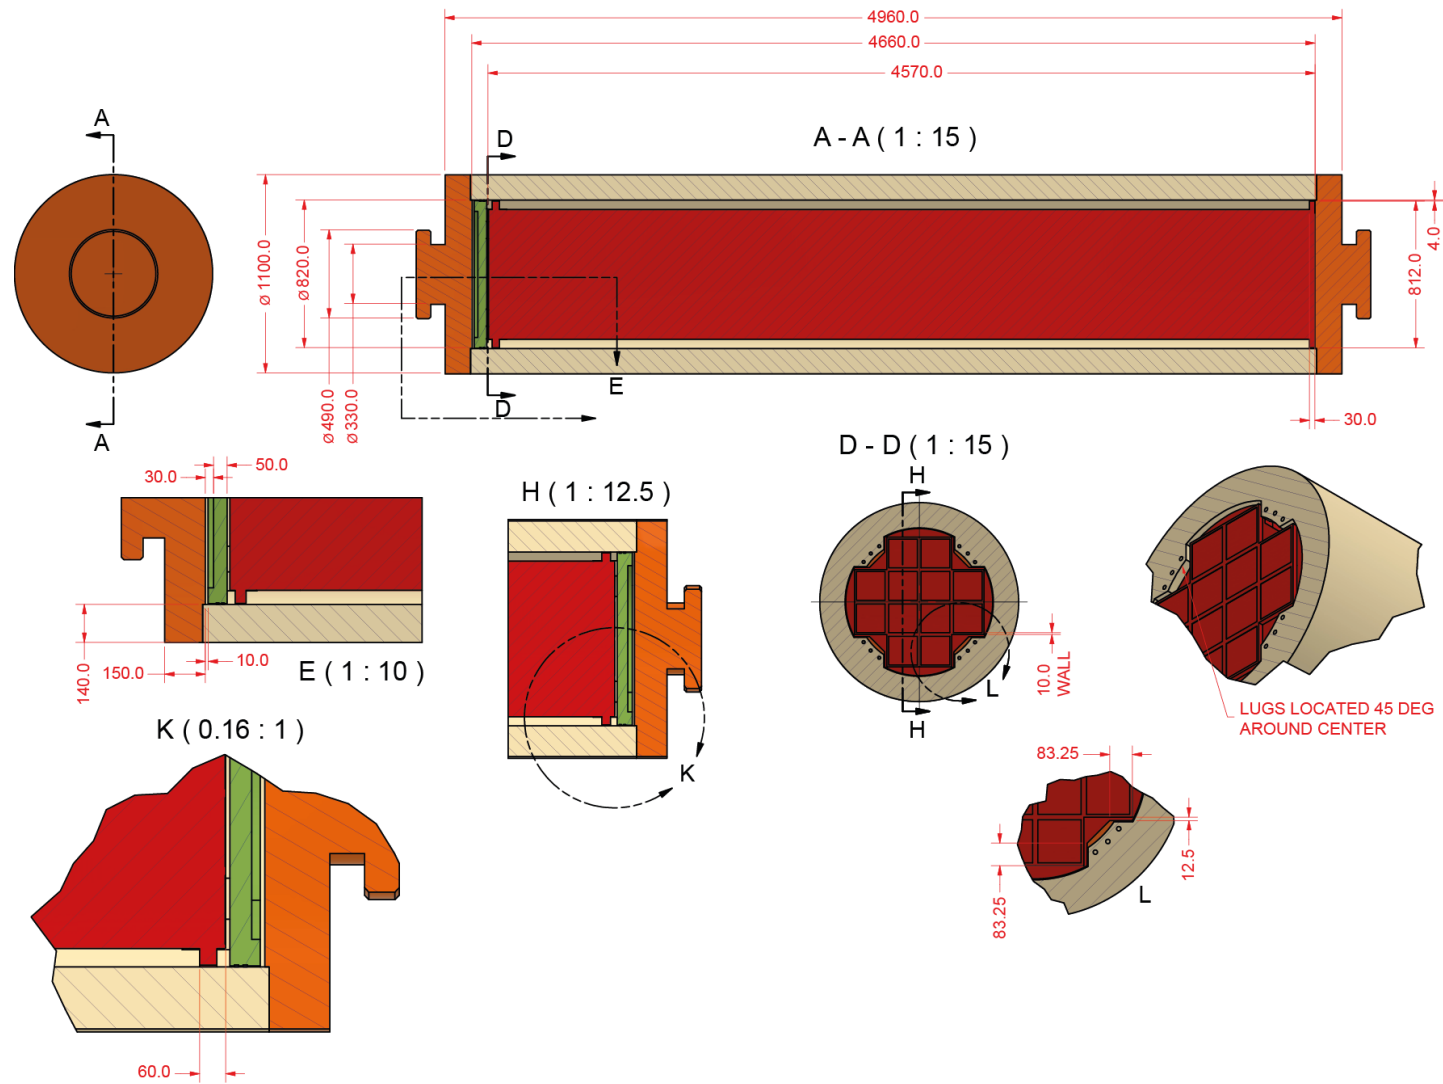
Engineering drawings of a SF-BWR disposal canister
